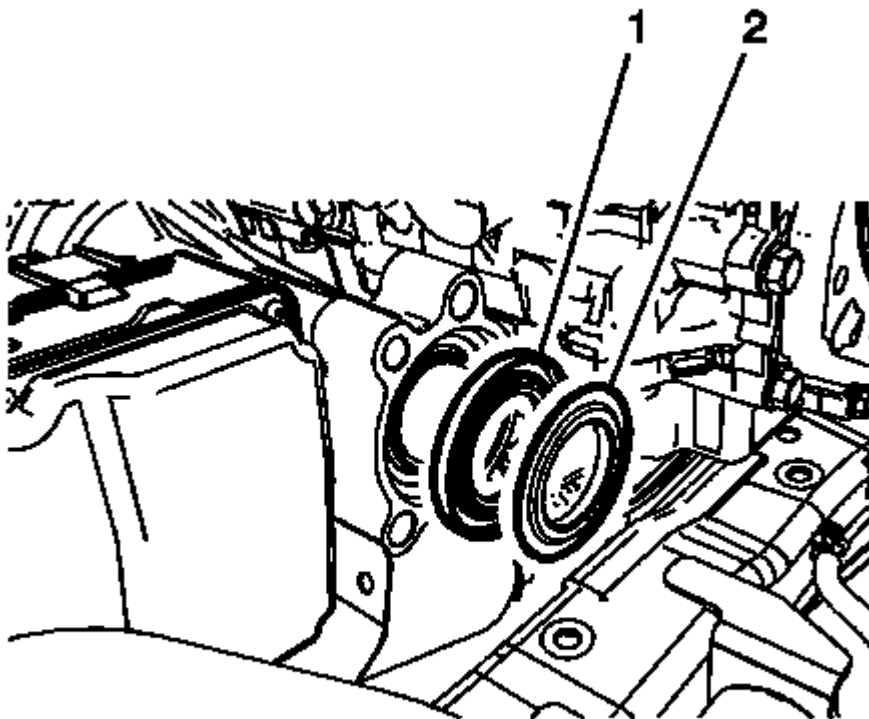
Wheel Drive Shaft Seal And Dust Deflector
